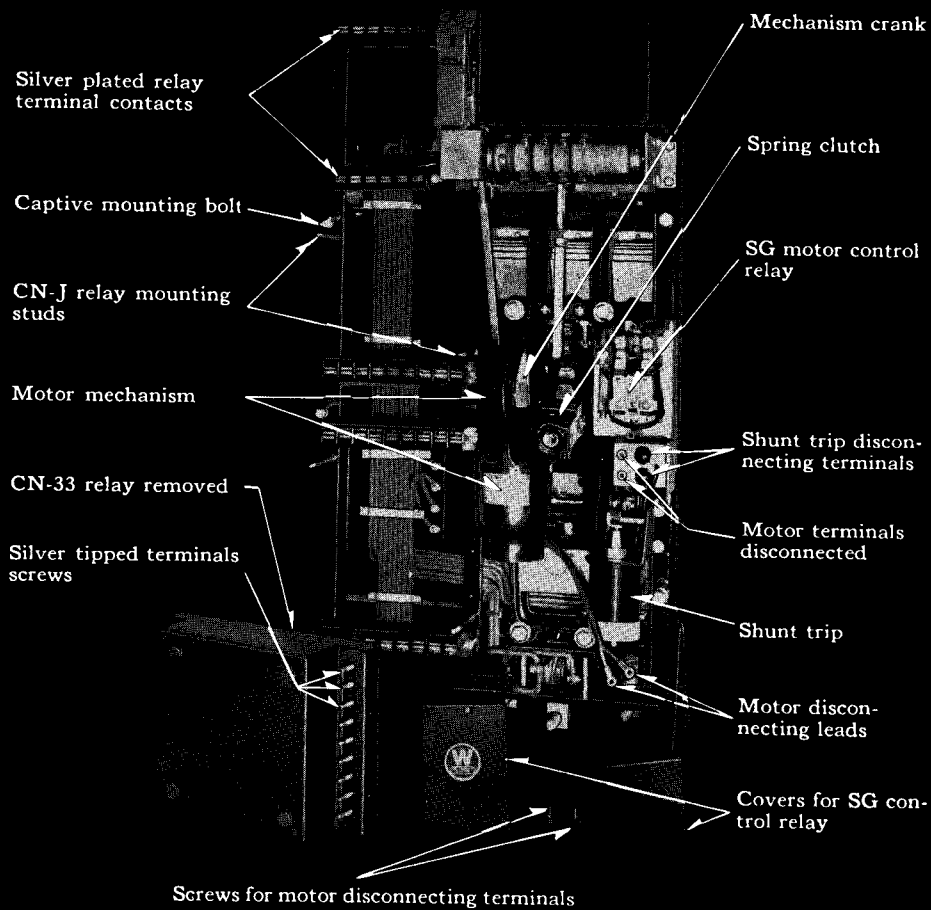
DETAILS OF THE CM-44 ROLL-OUT UNIT SHOWN BY REMOVING RELAYS AND BARRIERS OVER SG RELAY. BREAKER HAS BEEN OPENED BY HAND (NOT TRIPPED) WHICH RESULTS IN BREAKER HANDLE LEVER SPRING CLUTCH BEING DISENGAGED FROM OPERATING LEVER AS SHOWN
